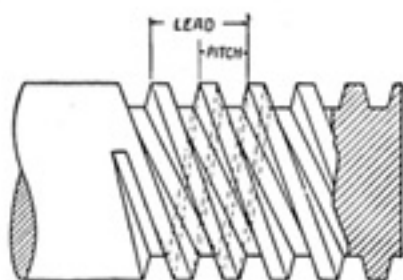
A multiple screw thread having two grooves (Double Thread)
